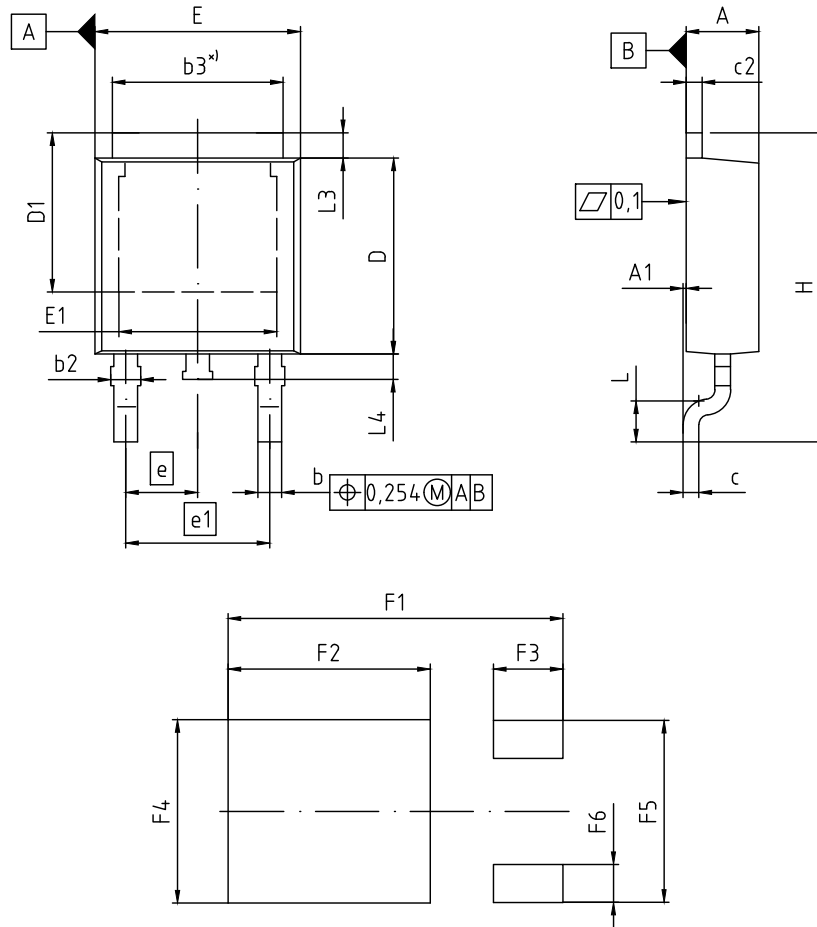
Outline PG-TO 262, dimensions in mm/inches
